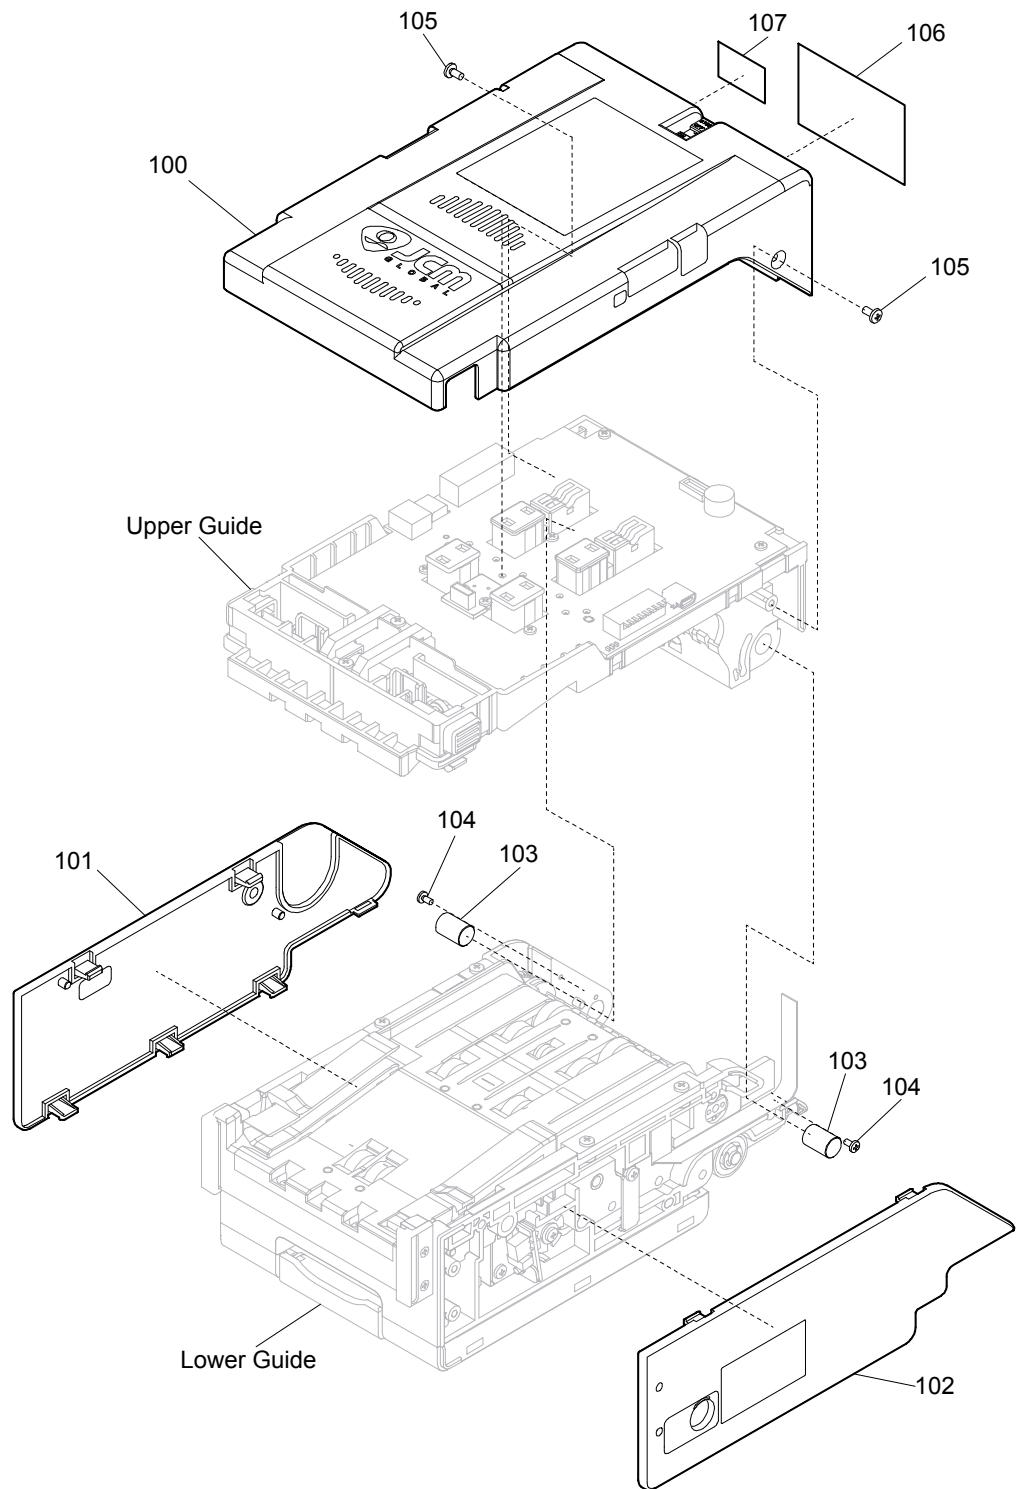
Entire EBA-40 Unit With SD3-Stacker Unit Exploded View
